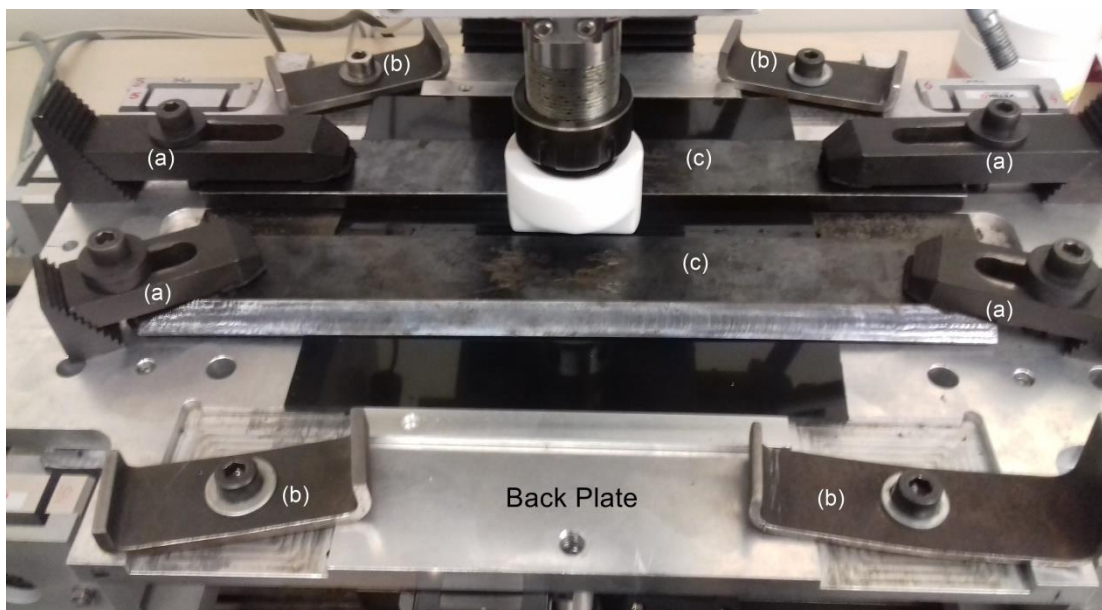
Clamping system used to grasp the two plates to be weld by FSW.
